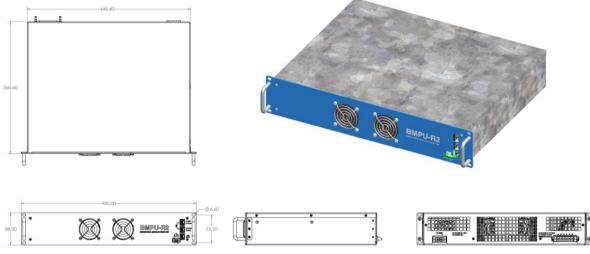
BMPU-R2-DC assembly drawing (with default real panel support)
